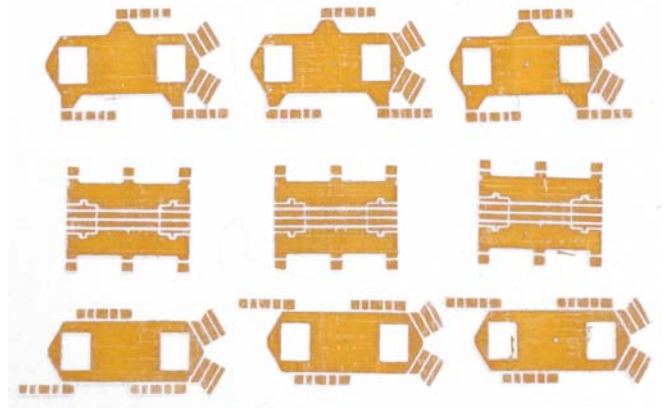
A palette of flat SCM parts showing 3 complete RoACH thoraxes ready for folding and assembly
